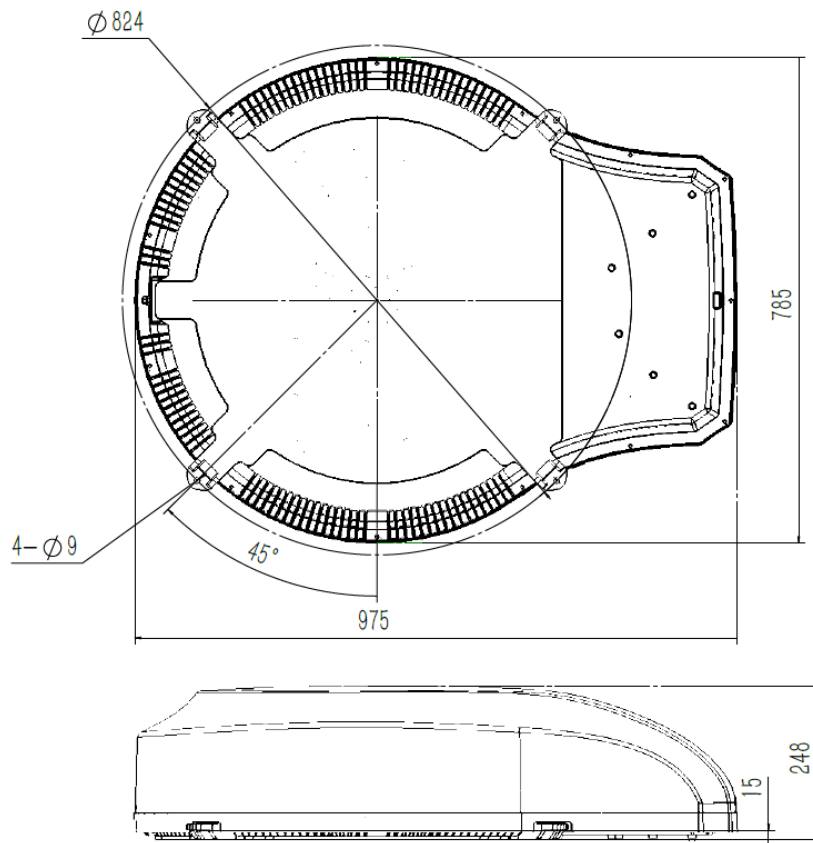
Overall Dimensions and Installation Holes Positioning
